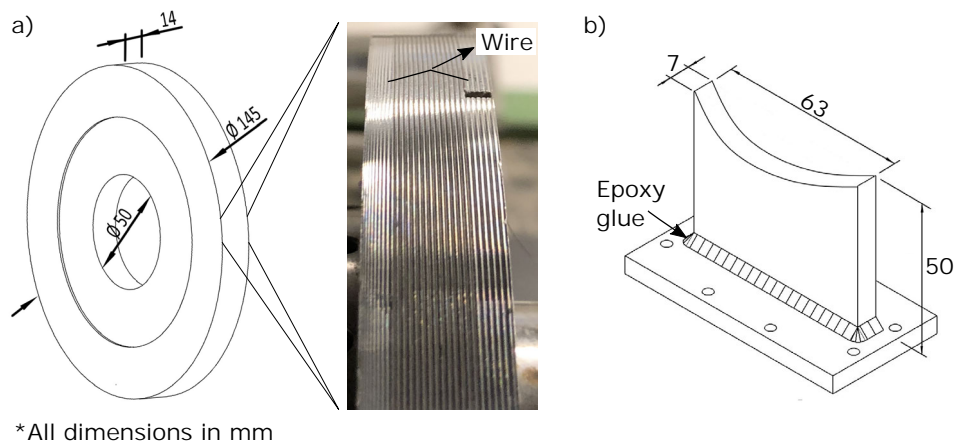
(a) Wheel dimensions and close-up view of the wheel grooves and the wrapped diamond wire. (b) Dimensions of the Si workpiece.
